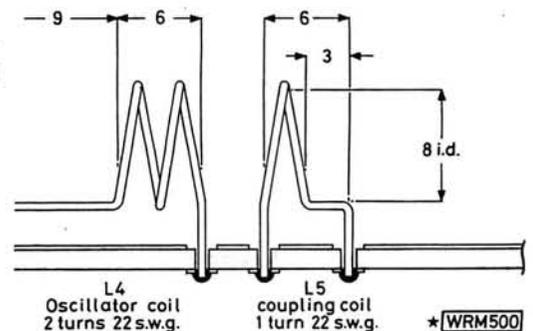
Details of the wound components, L4 and L5, and their mounting
